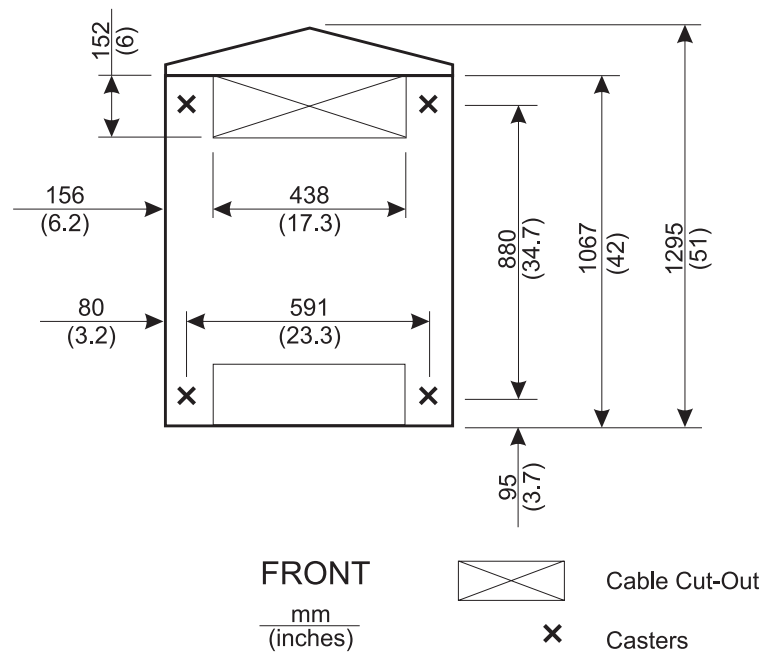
1.93 m frame: cable cut-out dimensions and caster locations (not to scale).
